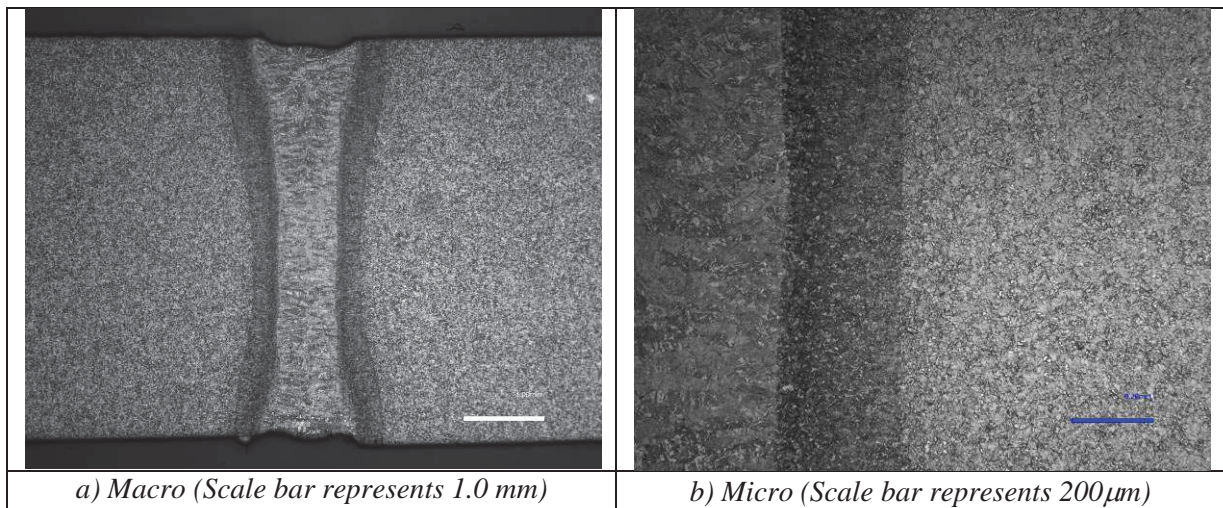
Welding Conditions of 4.5 kW and 41.7 mm/s (108 J/mm)
